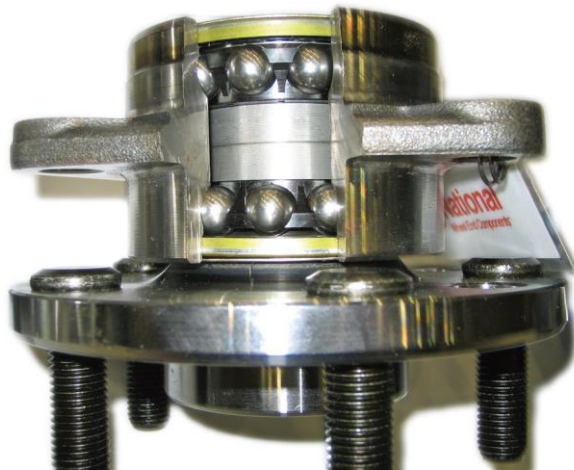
A sealed wheel bearing is replaced as a complete assembly.
